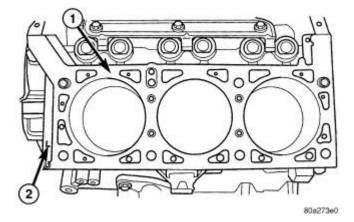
Head Gasket Installation Courtesy of CHRYSLER LLC
